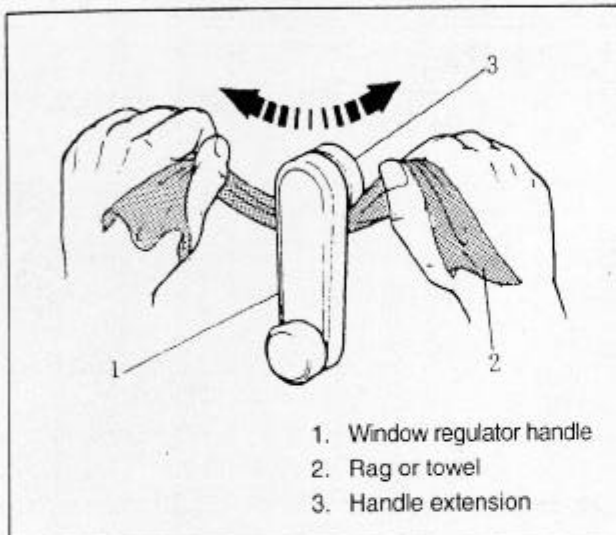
7 REGULATOR HANDLE REMOVAL
